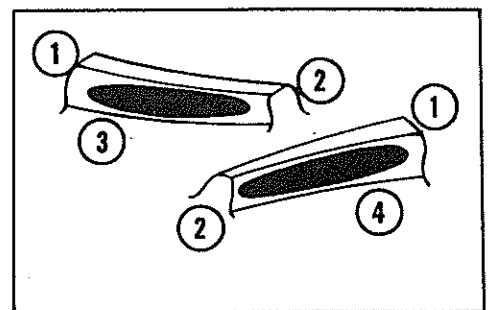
RING GEAR TOOTH BEARING PATTERN, LOADED
